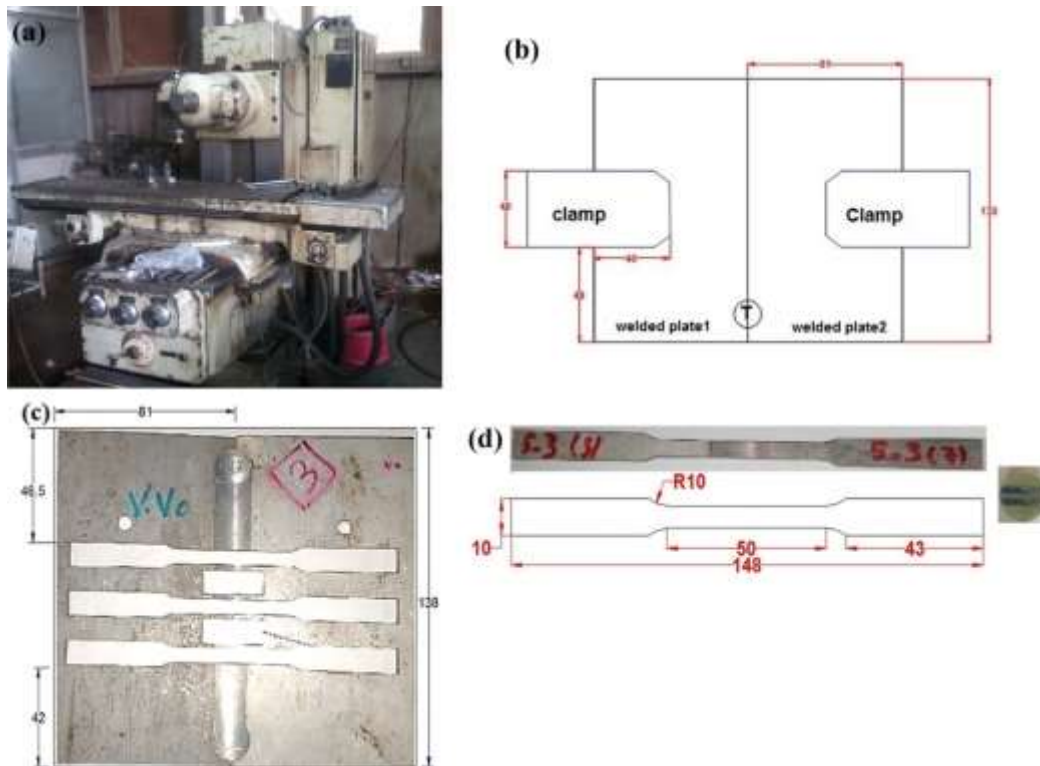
WMW ECKERT machine used (a), clamping system (b), welded joints after machining of test specimens (c), and test specimens (d)
